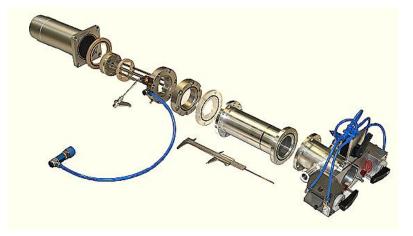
Picture of the component parts of the BC1710 beamline extension before assembling.
